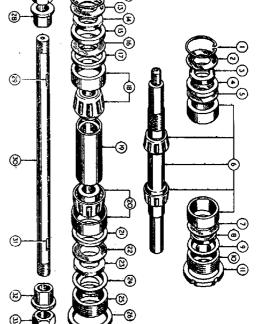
Arrangement of Wheel Bearings. (Top) Front : (bottom) rear
